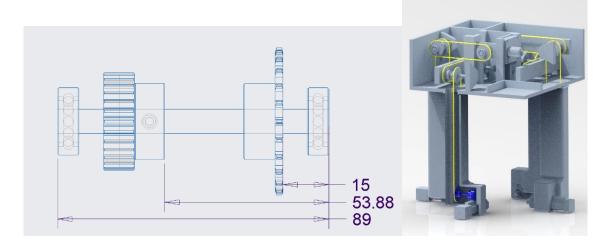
left: Knuckle shaft drawing (all dimensions in mm) right: Knuckle shaft placement (blue)
